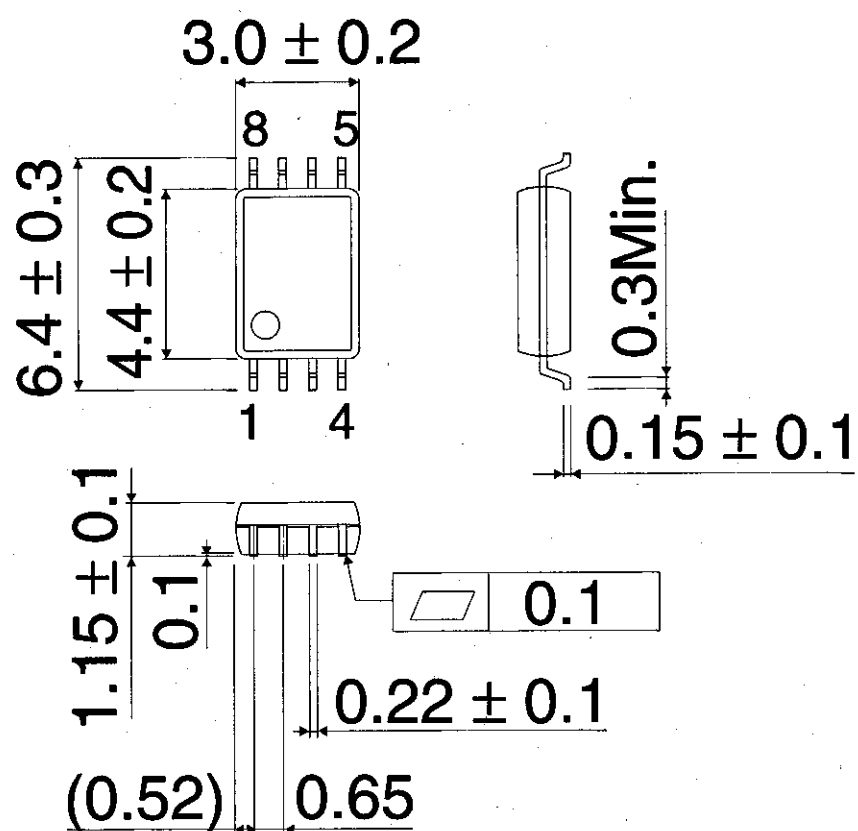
Outline Dimensions SSOPB8(BR9020FV-W)
